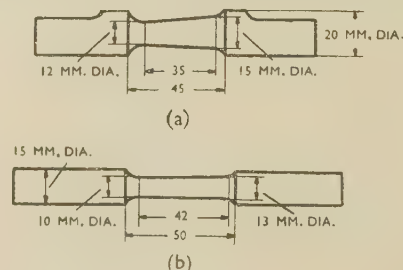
Shape and Dimensions of Specimens: (a) for repeated torsion tests, and (b) for rotating-bending tests.
